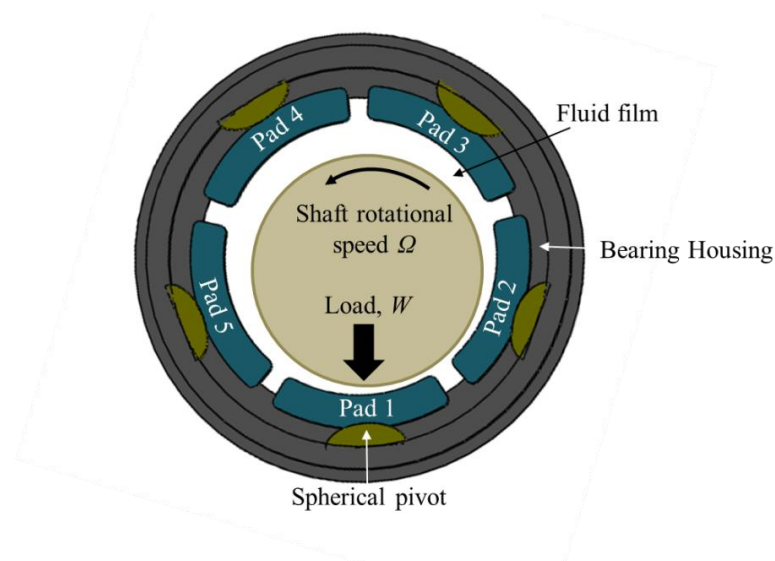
Schematic view of a five-pad, spherical pivot tilting pad journal bearing.
